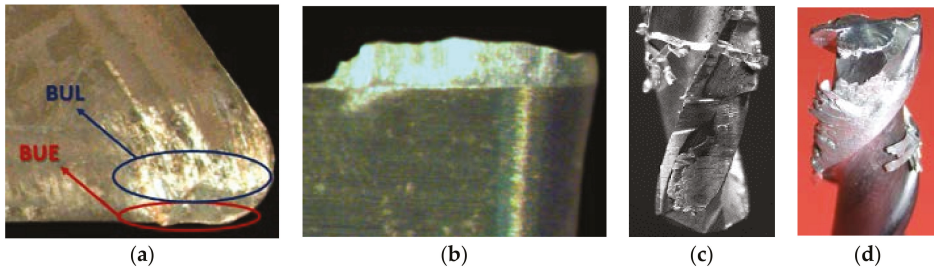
Cutting tools affected by adhesive wear mechanism in the machining of Al alloys: (a) turning insert tool; (b) detail of the adhered material thickness; (c) drilling tool; (d) milling tool for radial operations.
